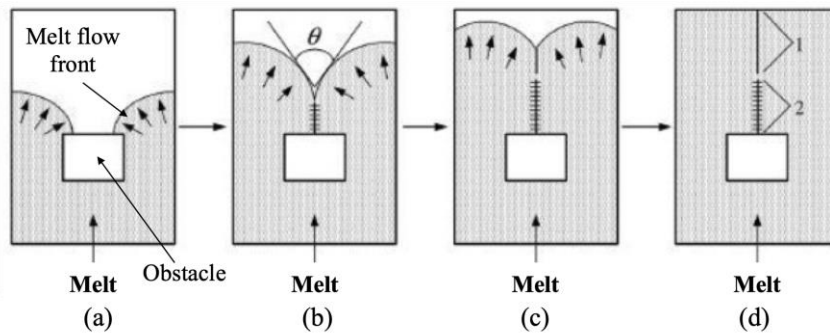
Weld line formation process and identification of types of welding line. (a) Separation of melt fronts; (b) weld (knot) line formation; (c) meld line formation; (d) filled cavity with weld line (1) and meld line (2) [5].
